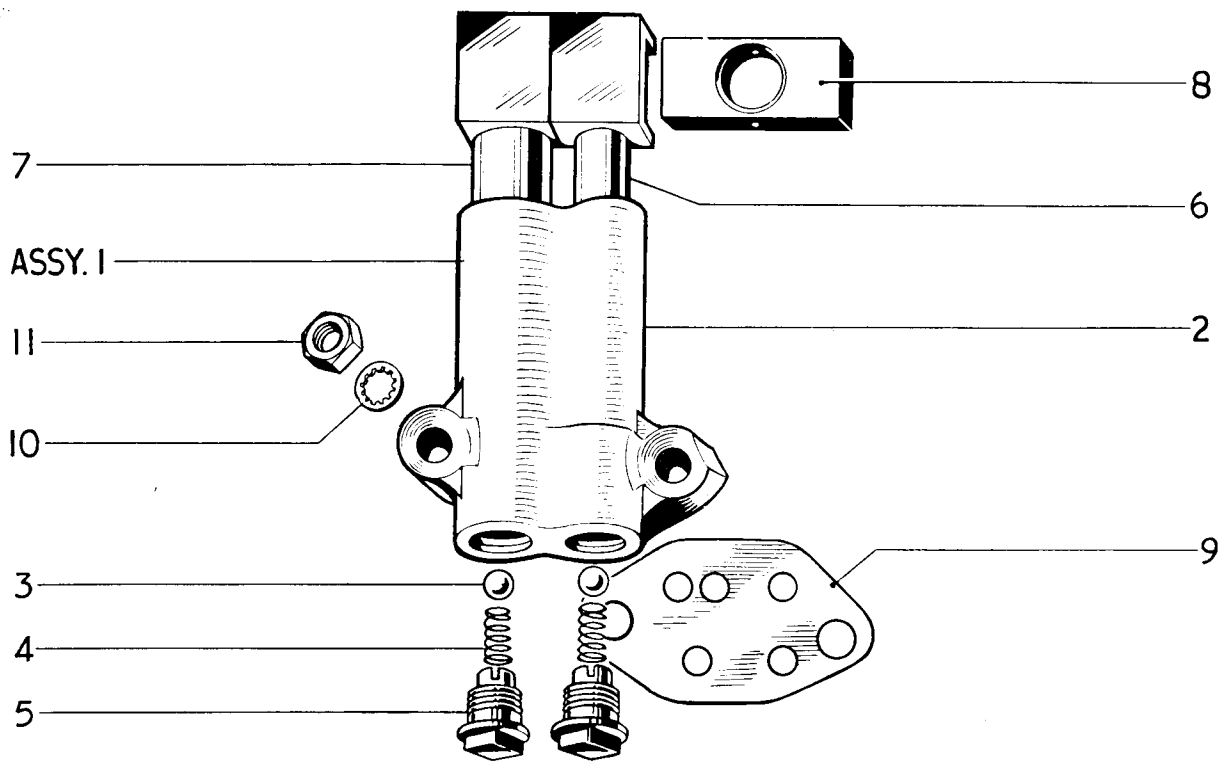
OIL PUMP, RELEASE VALVE AND INLET MANIFOLD
